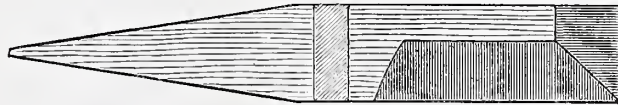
Plan of Underside of Side-Cutting Wood-Turning Tool. (Full size.)
